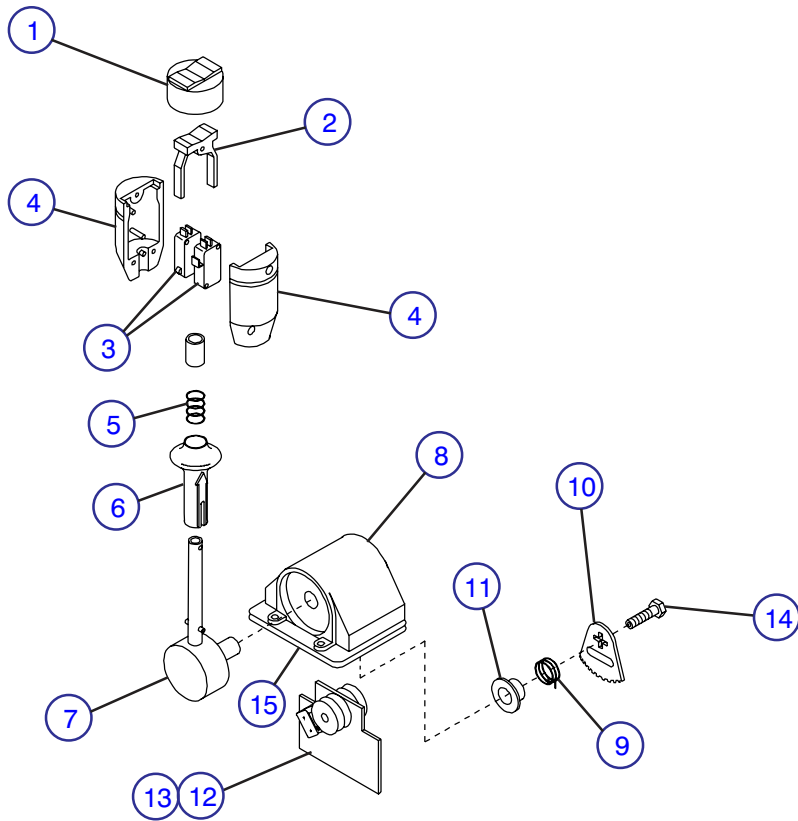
PROPORTIONAL DRIVE/LIFT CONTROLLER ASSEMBLY
